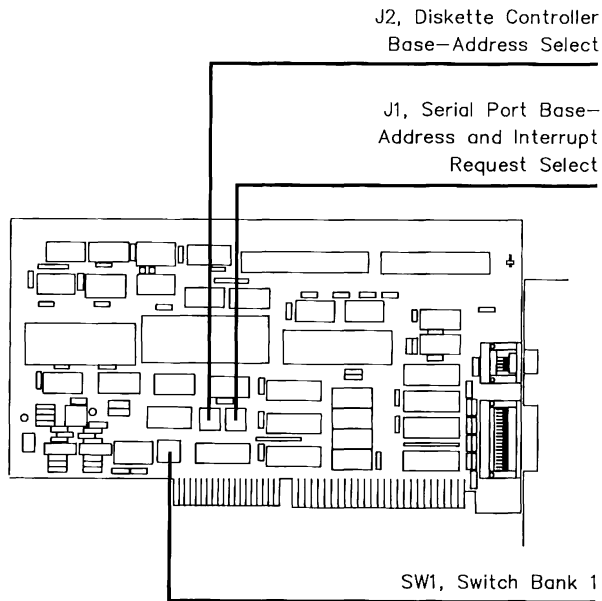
Multipurpose Fixed Disk Drive Controller Board Jumper Locations
